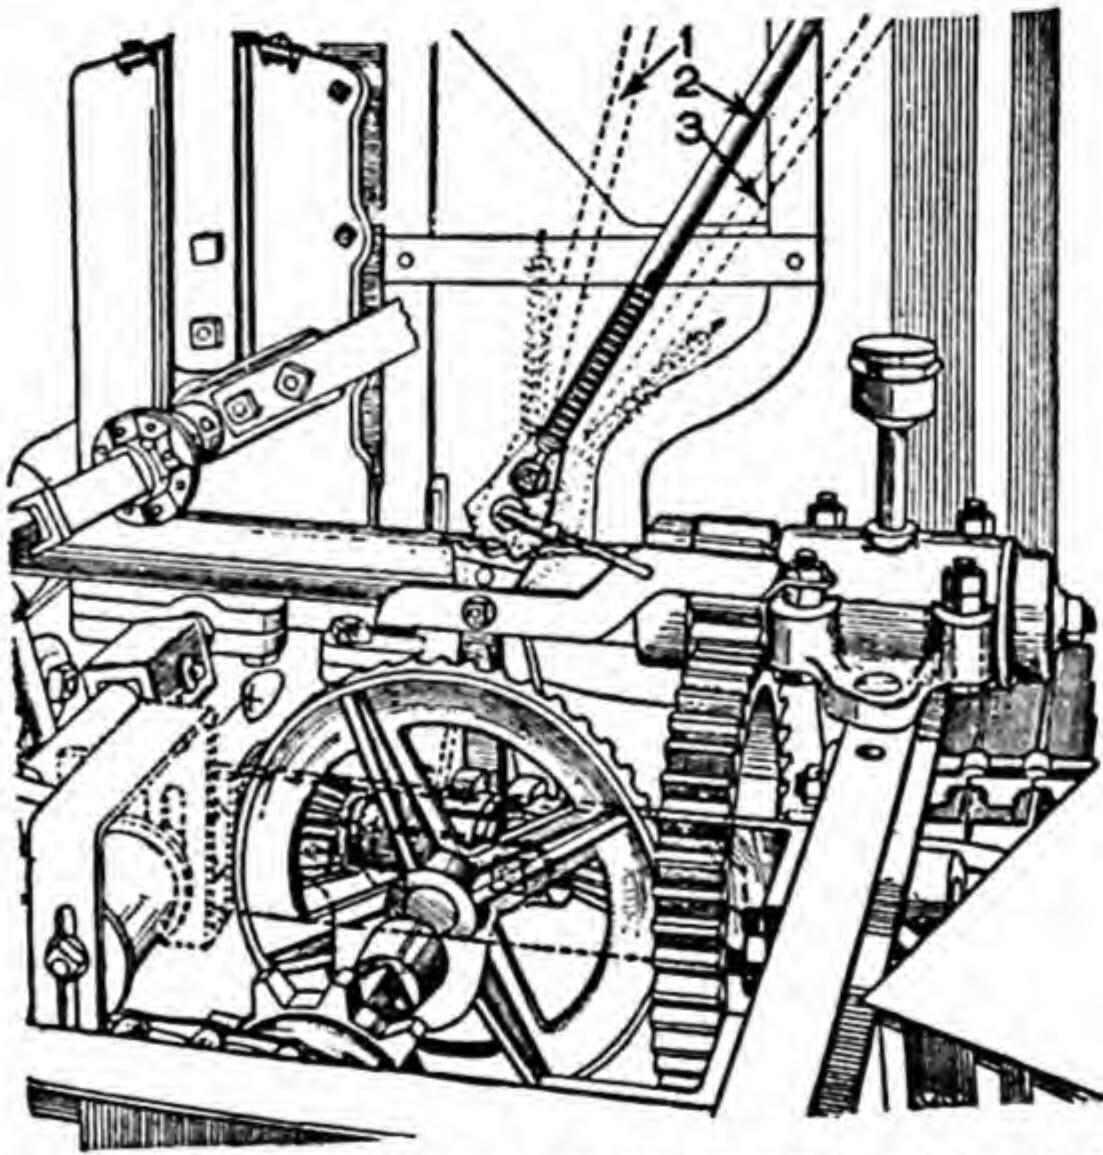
Feed-control lever: 1, reverse position; 2, neutral position; 3, forward position.
